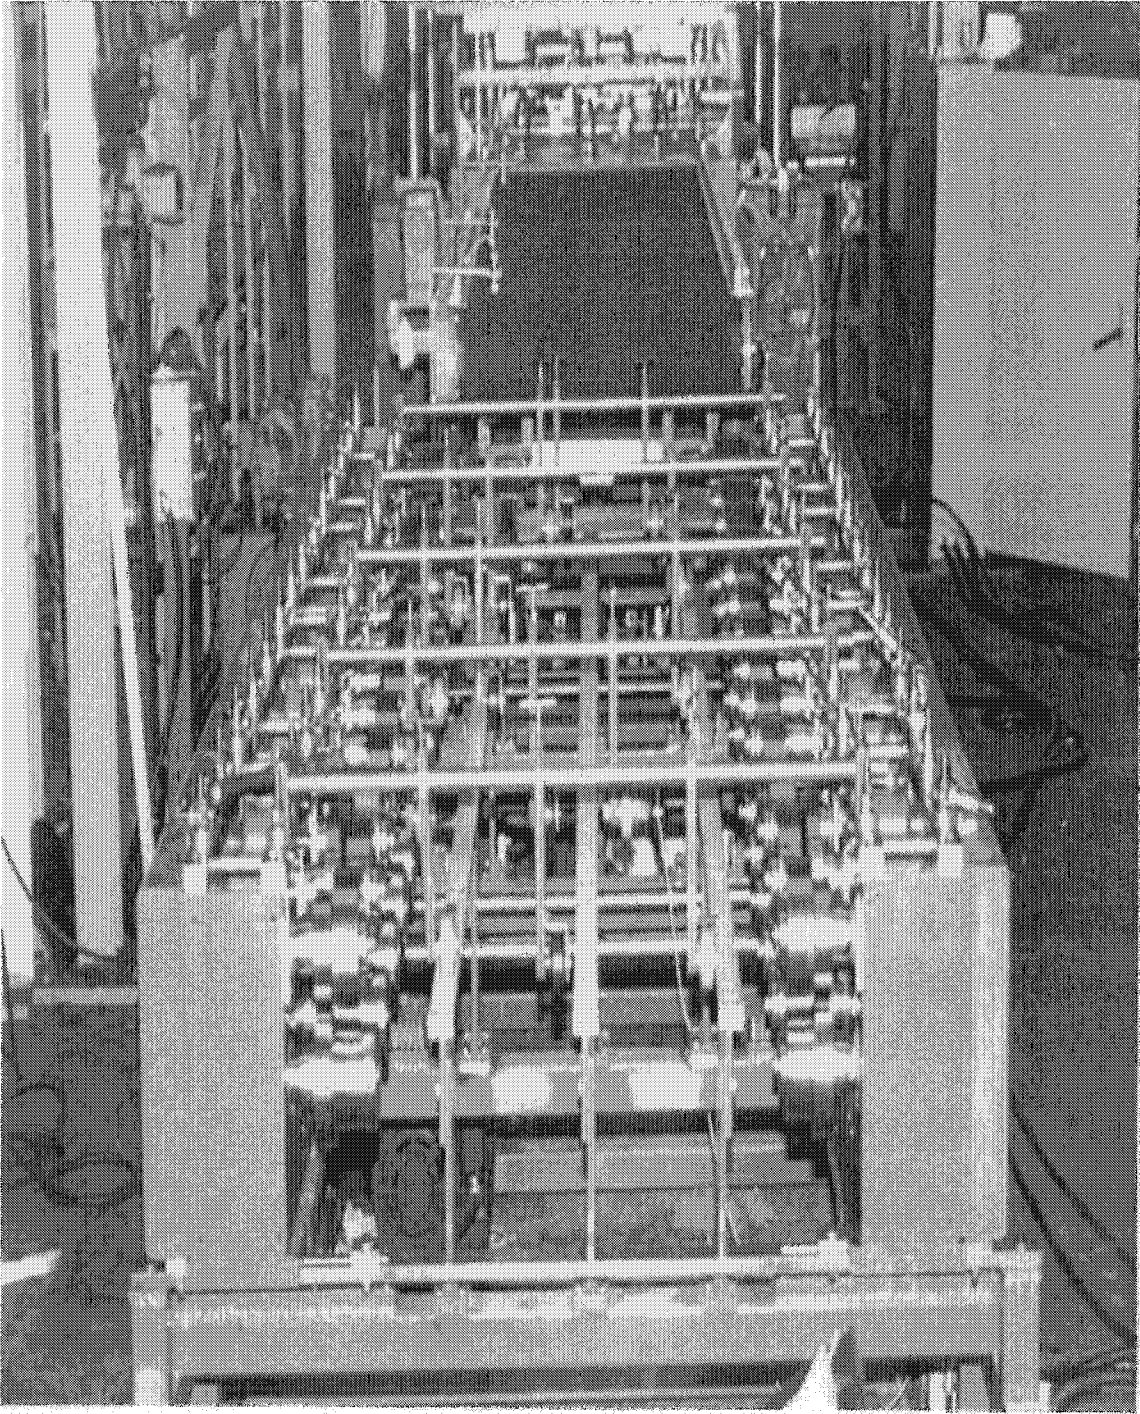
Roll Former and Roll Former Entry Conveyor
